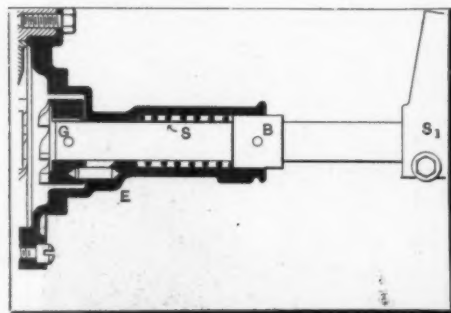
Showing how the spring prevents the starting crank from contacting with the shaft engagement
